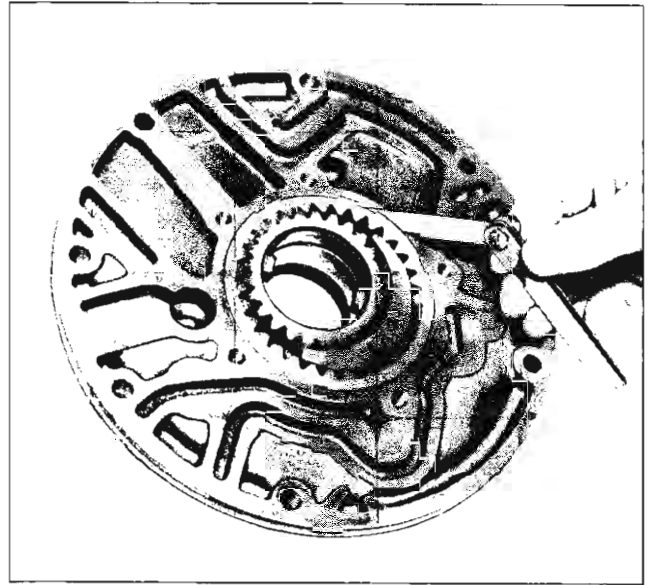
PG—Checking Driven Gear to Pump Body Clearance
